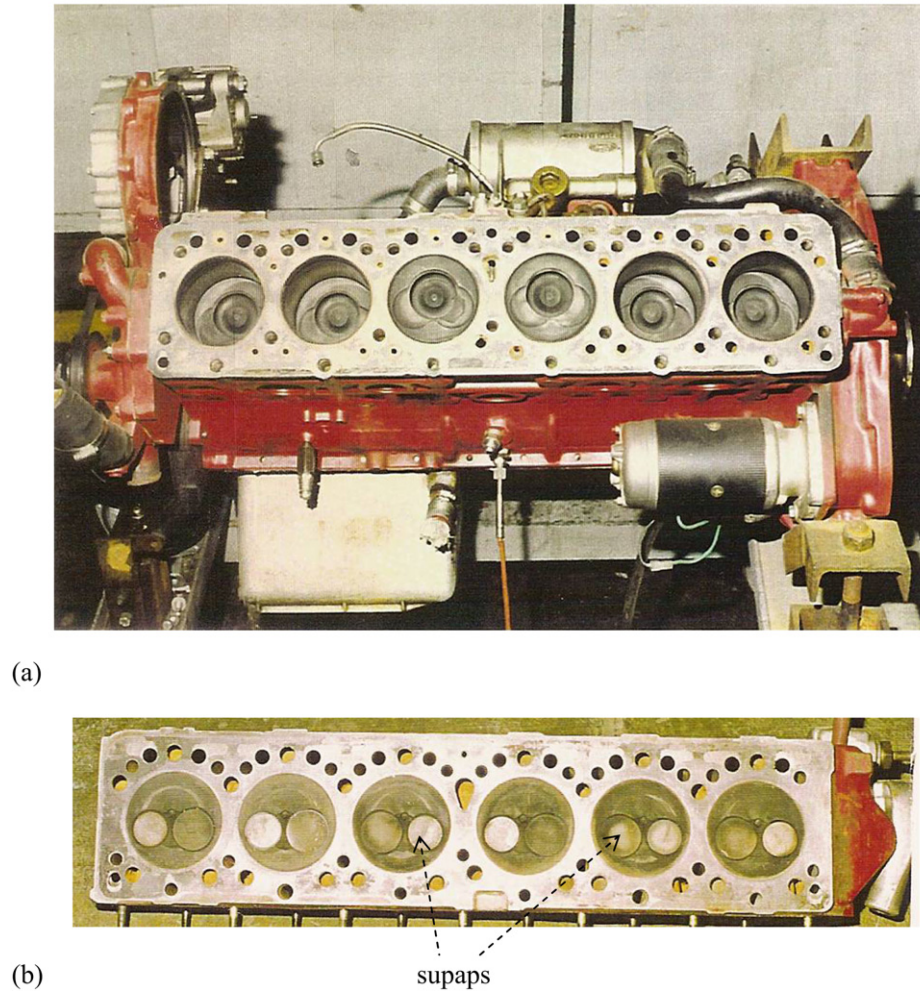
The photo of the coating engine tested: (a) pistons, (b) cylinder head.
